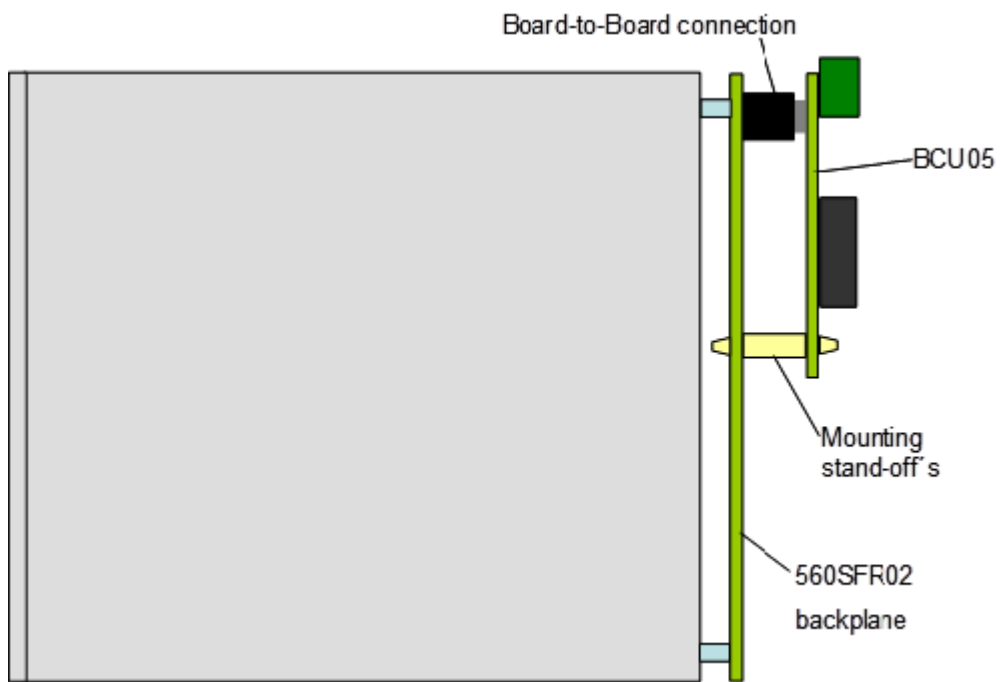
Assembly 560SFR02 and 560BCU05 R0001
